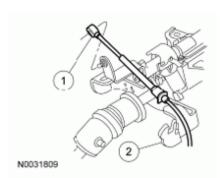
Identifying Selector Lever Cable And Locking Tab Courtesy of FORD MOTOR CO.
